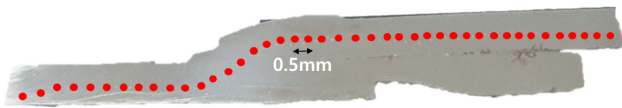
The position where the hardness is measured at the fracture surface of the CMT welded specimen
